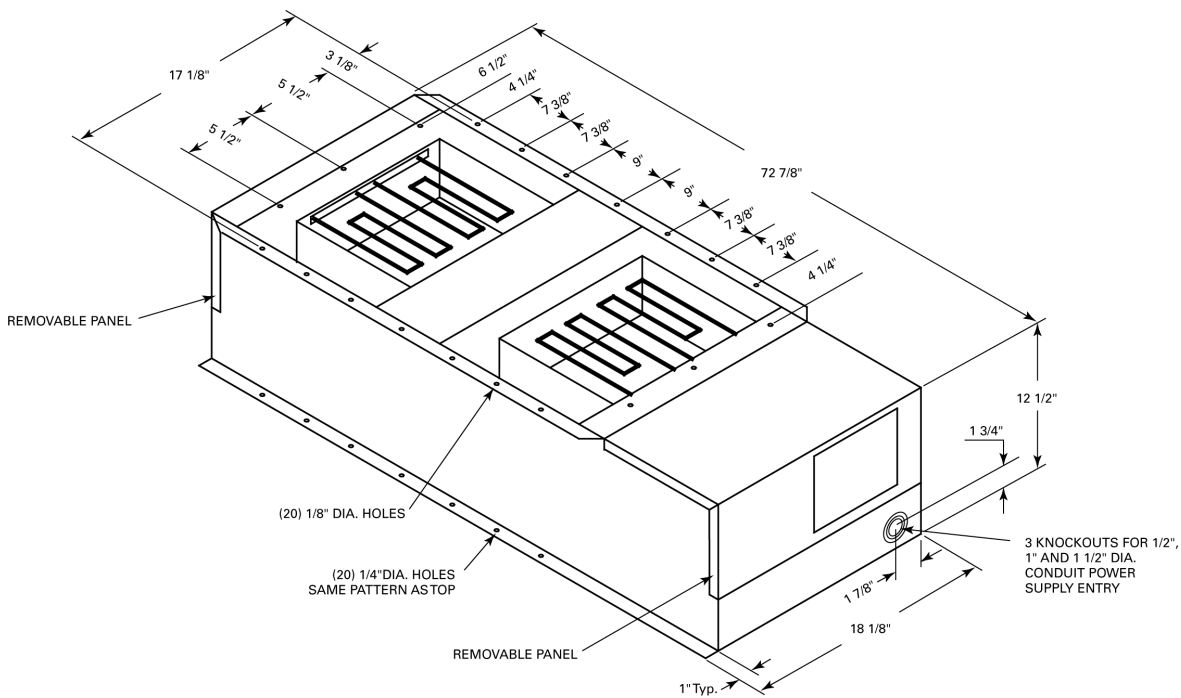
Electric Heater Accessory for 12½-25 Ton Air Handlers. All dimensions are in inches.
